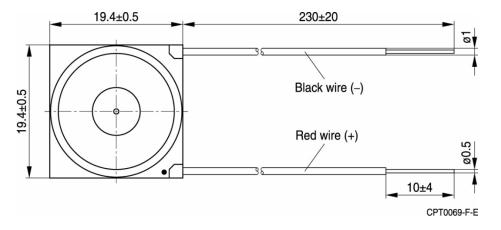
Dimensional drawing of PowerHap 1919H021V120 with soldered cables
